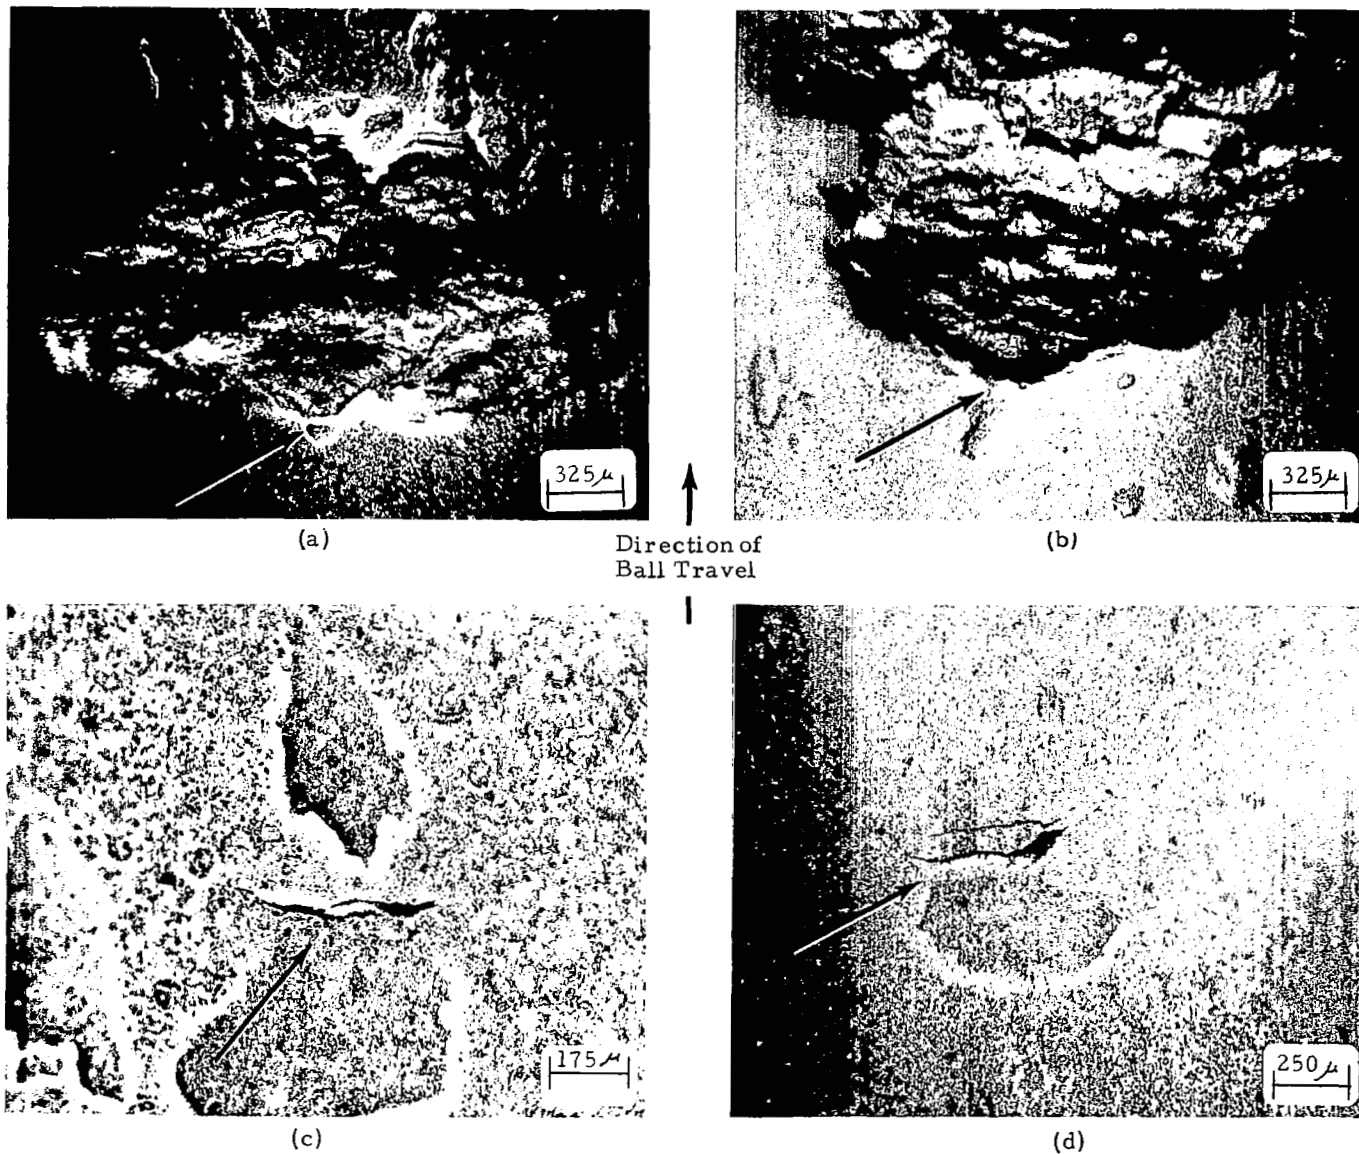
SPALLS (a-b) AND PRE-SPALL CRACKING (c-d) AT SURFACE INDENTS. (Arrows indicate spall formation at trailing edge of indents).
